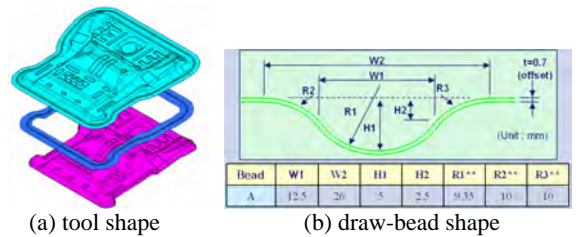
Schematic shape of the tools used for manufacturing rear floor panel
